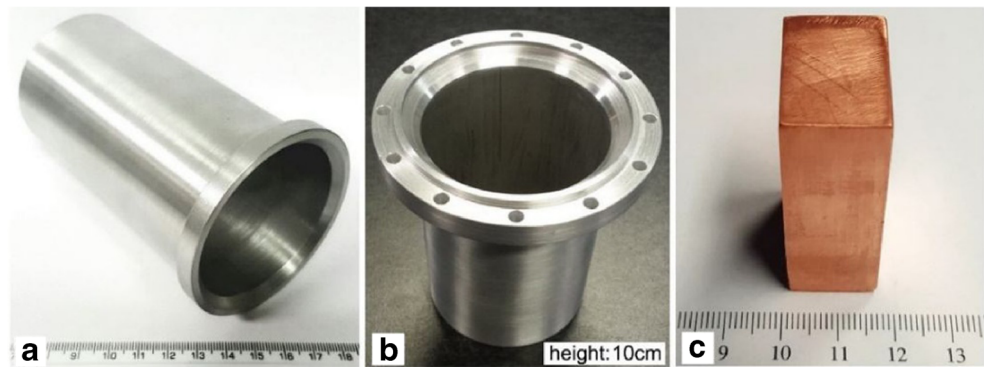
Finished part fabricated by machining of SPD produced parts. a Aluminum alloy tube. b Aluminum alloy flange. c Copper cuboid [71]
